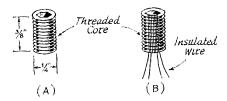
(A) Threaded core as removed from slug-tuned coil. (B) Miniature core with bifilar-wound coils.
